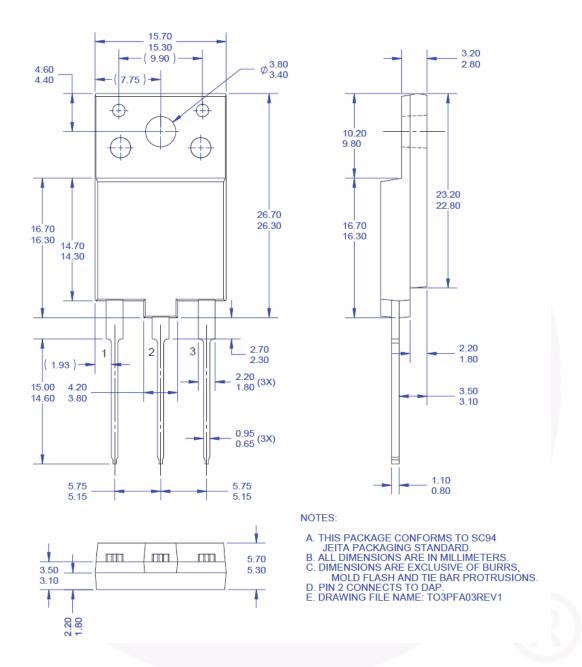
TO3PF, Molded, 3-Lead, Full Pack (AG)
